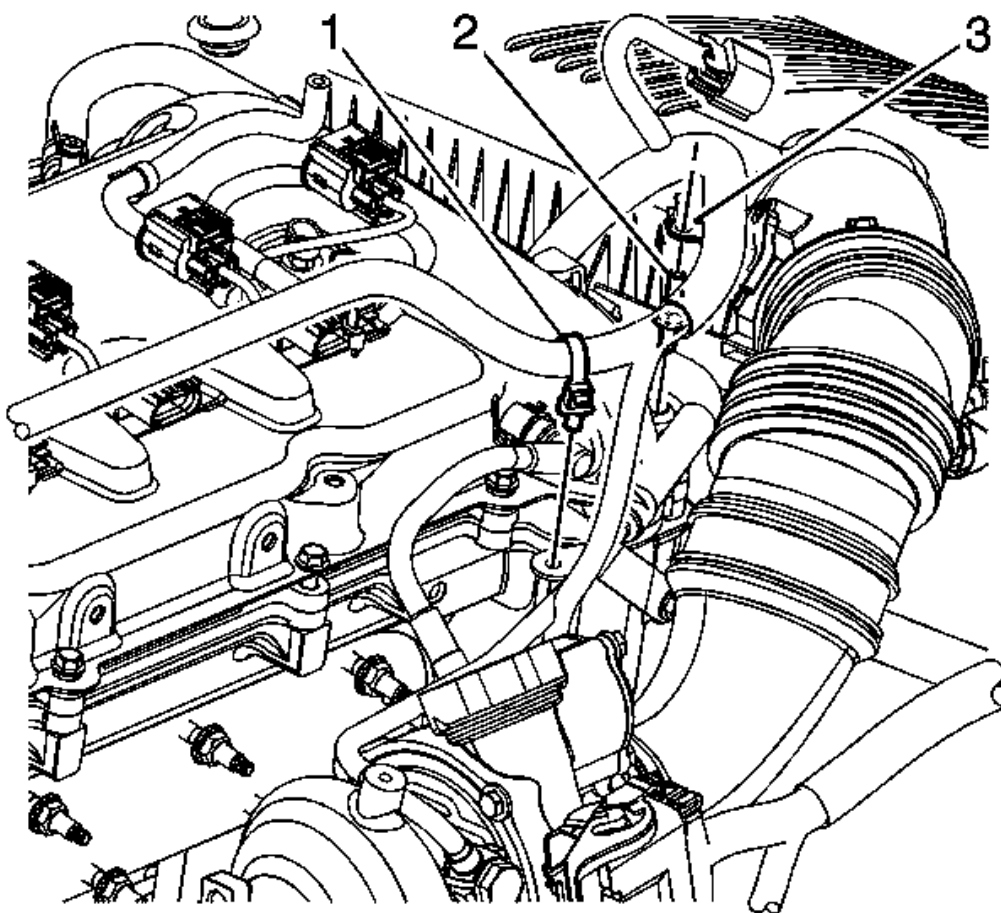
View Of Turbocharger Coolant Feed Pipe Clips & Studs
